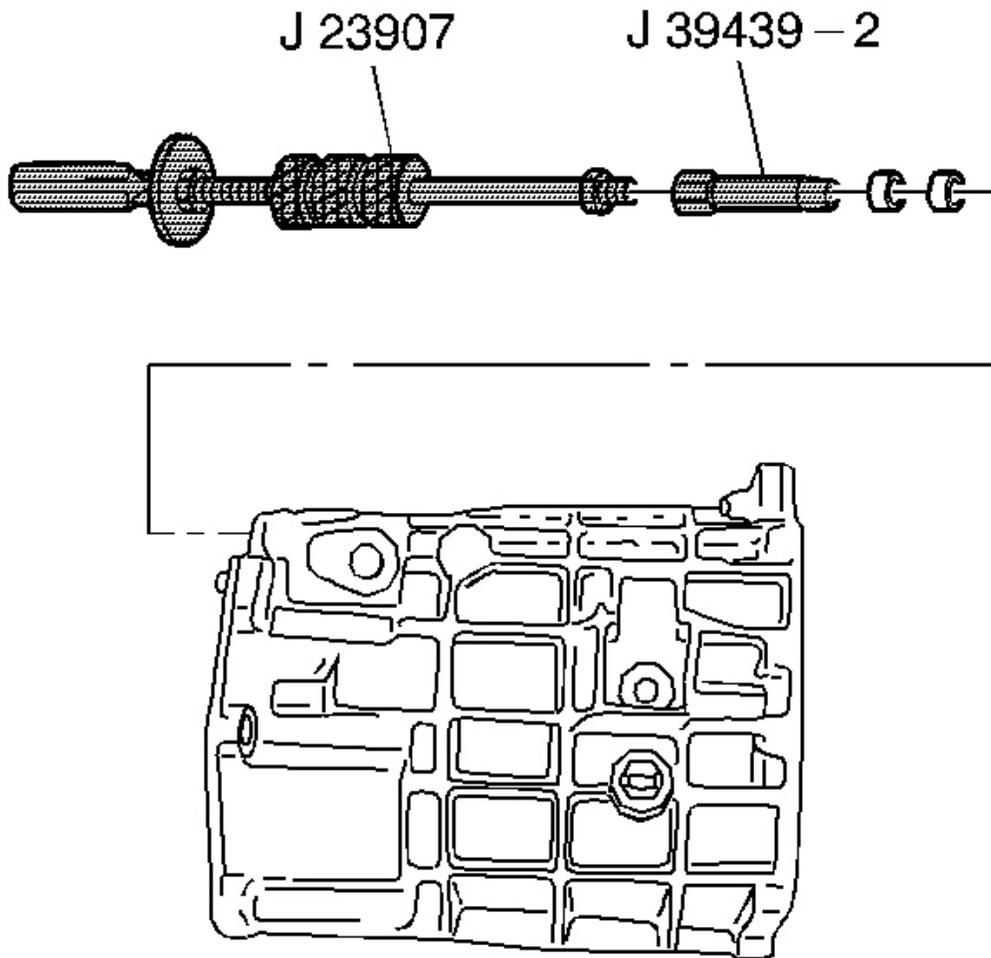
Removing 1st/2nd & 3rd/4th Shift Shaft Bushings Using The J 23907
